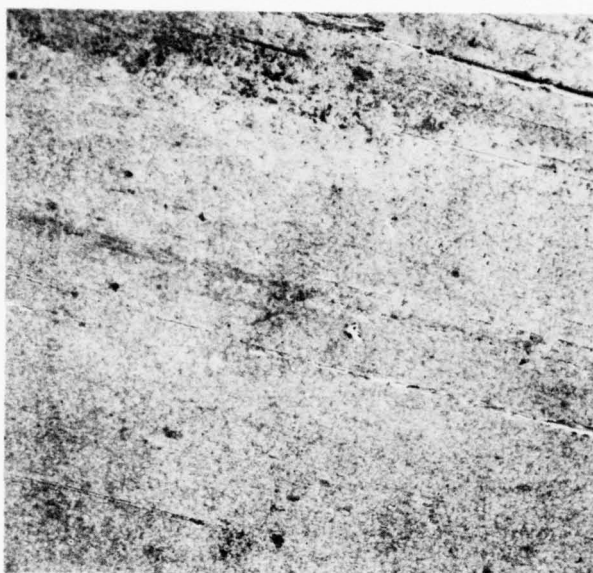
POST TEST CONDITION OF TEST BEARINGS.
